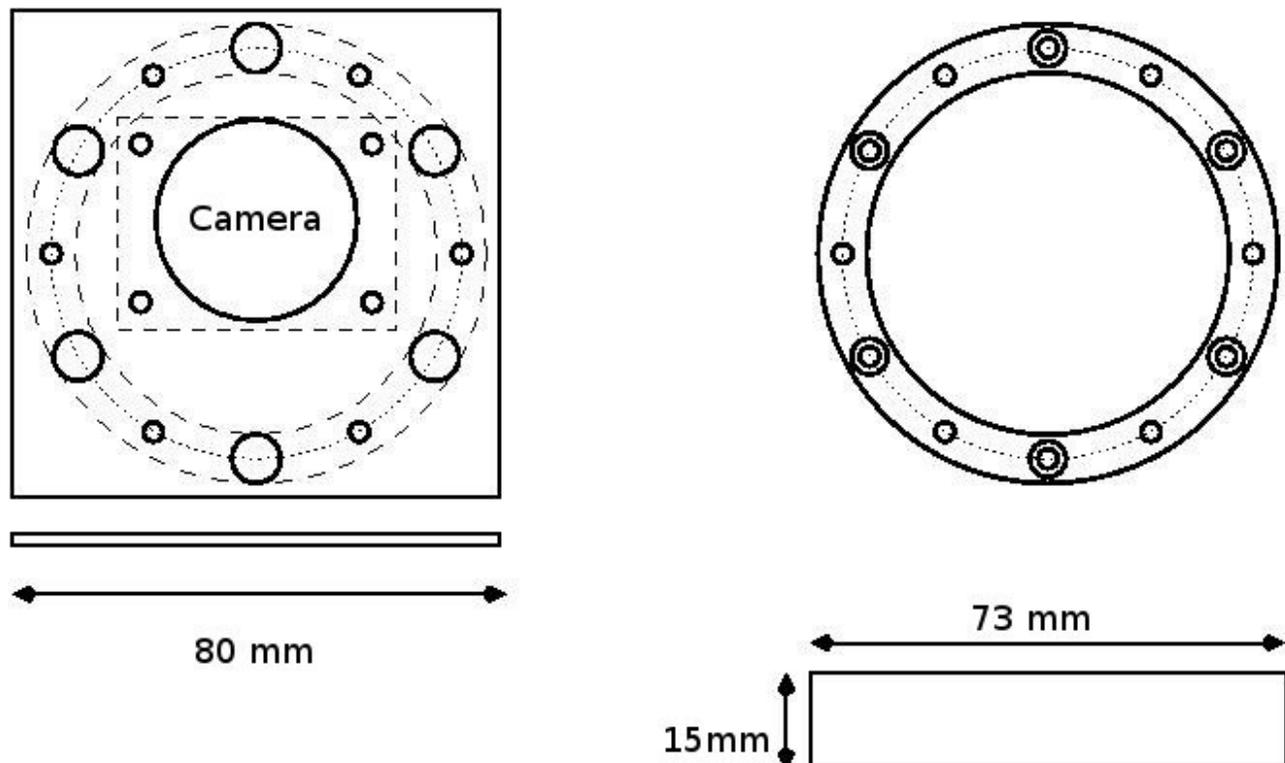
Drawing of camera mount for Fiber plate alignment.
